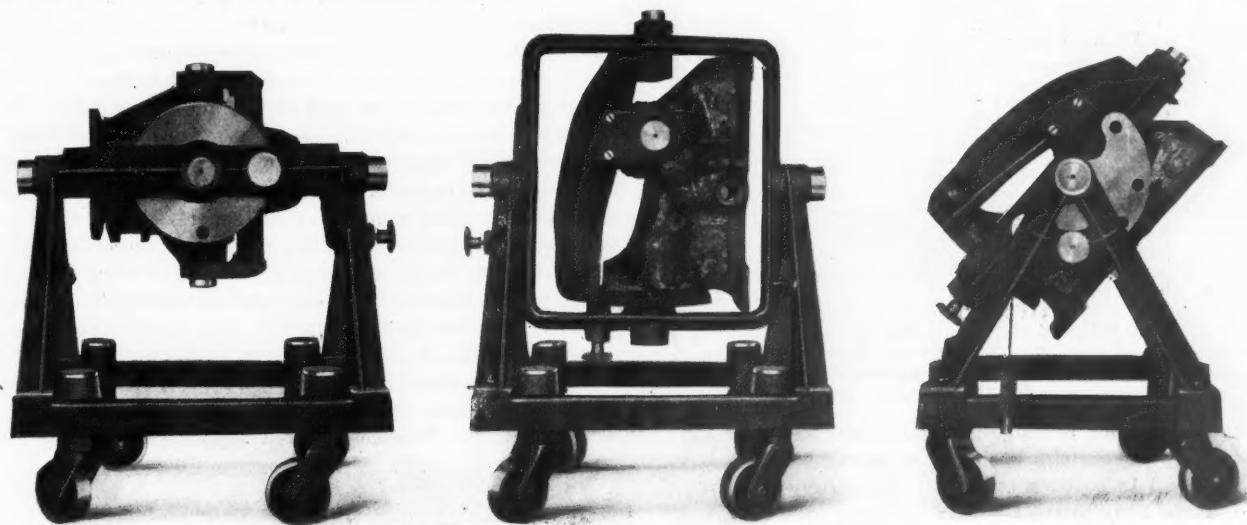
Jig with Universal Adjustment, built by the Rockford Drilling Machine Co.
